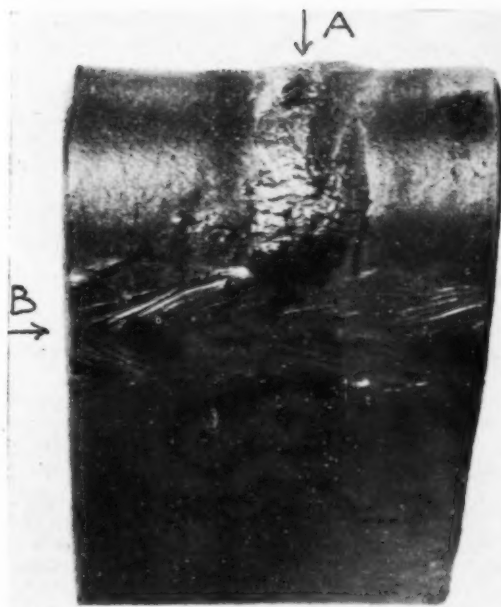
Intergranular corrosion in weld metal resulting from oxidation of titanium during welding. A—first weld; B—second weld.
